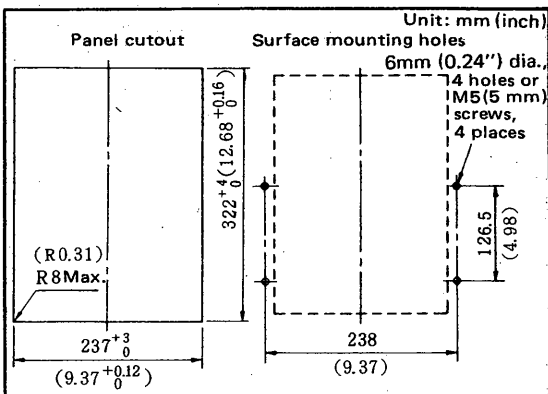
Panel Cutout and Surface Mounting Holes.
